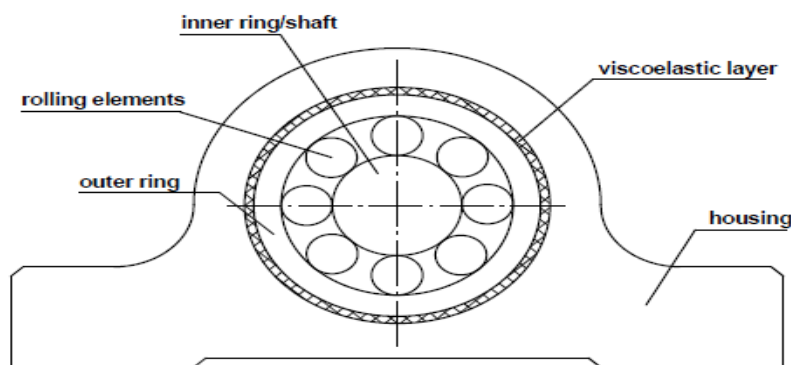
A Viscoelastic Layer Mounted Between The Bearing Outer Ring and The Housing.
